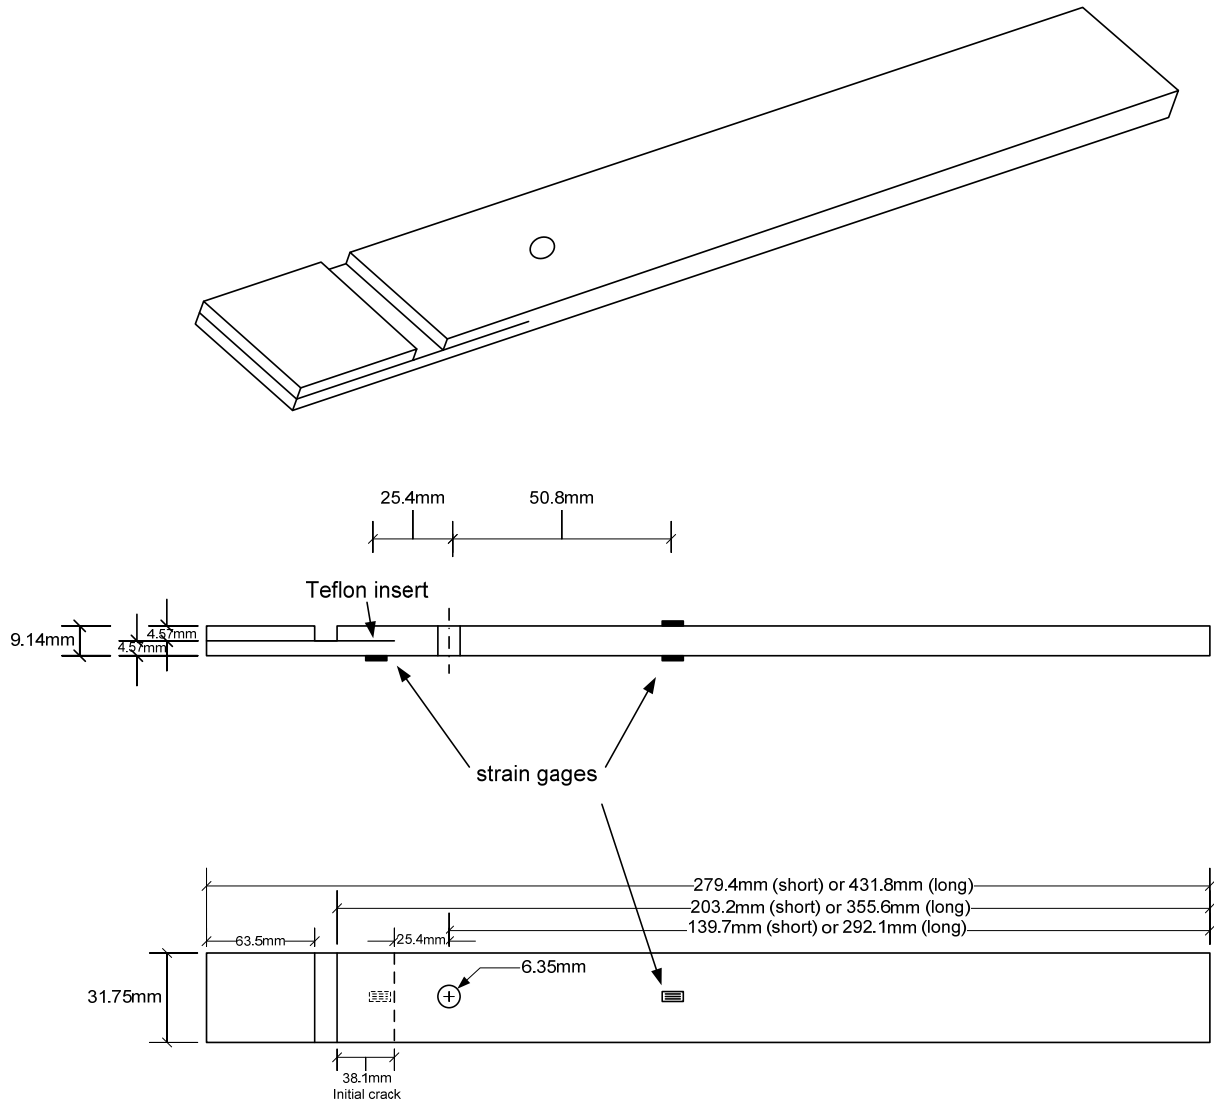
Drawing of the Tension Crack Arrest Test Specimen (not to scale)
